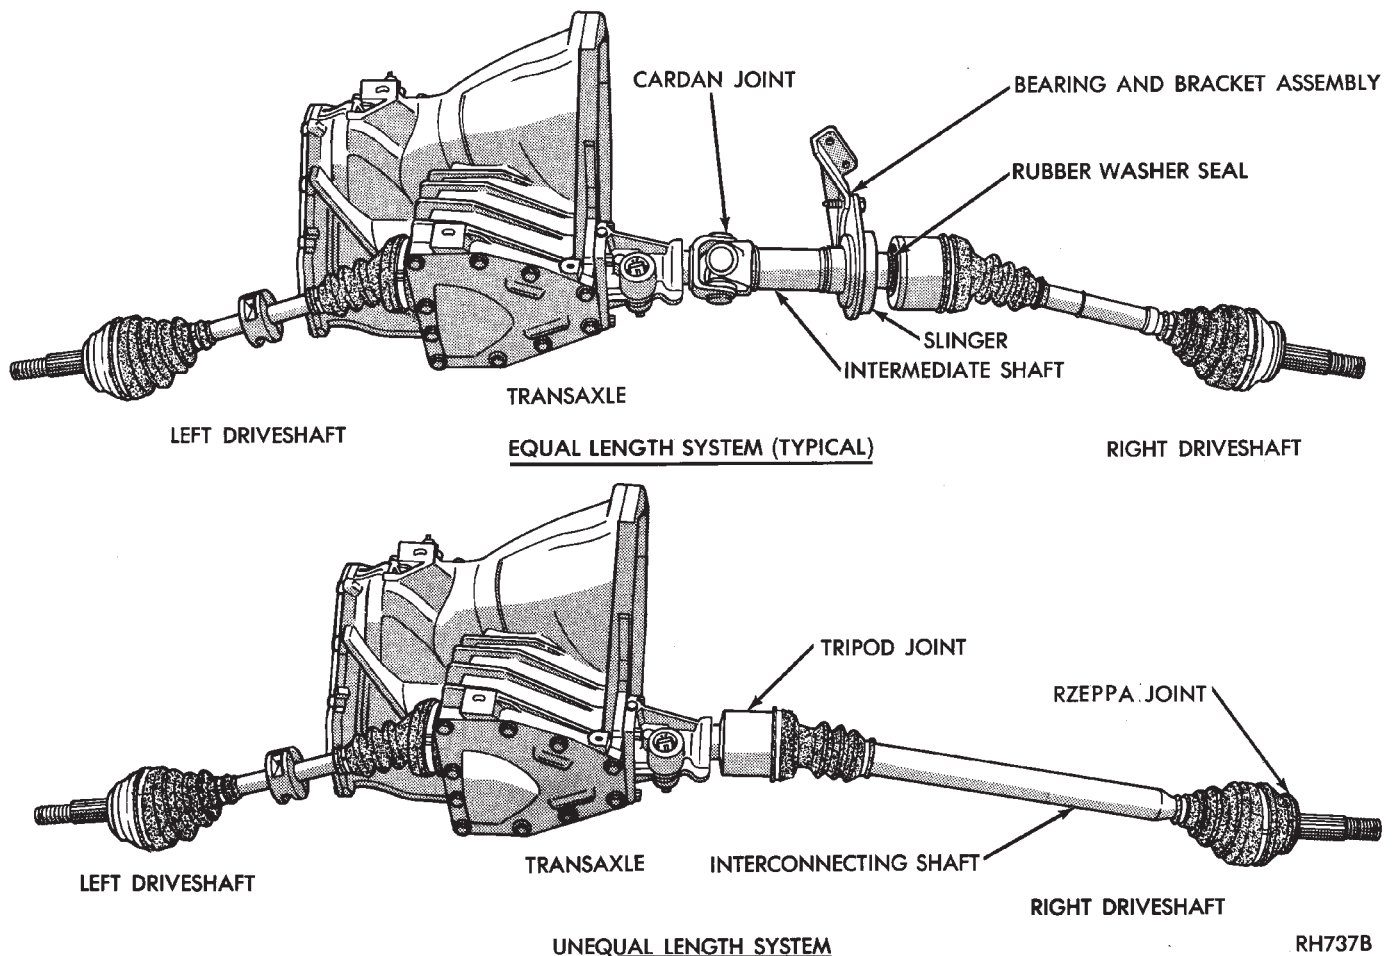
Front-Wheel-Drive Driveshaft Systems
